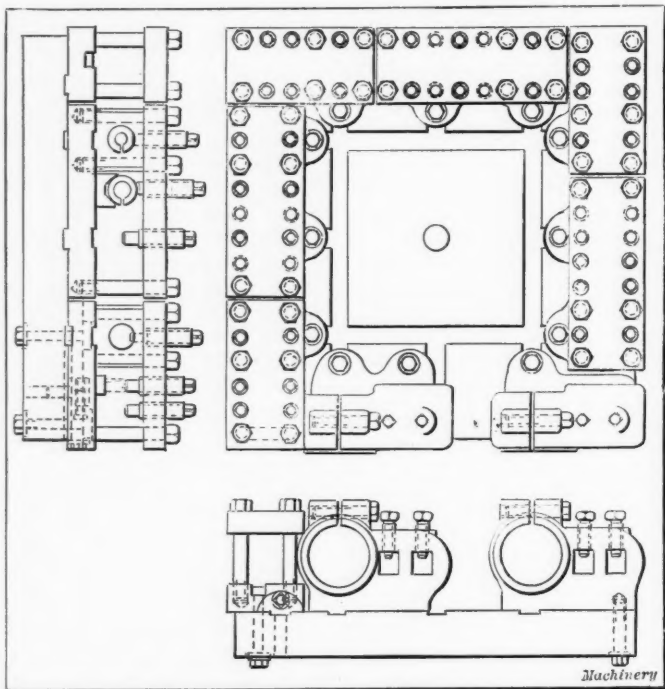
Elevations and Plan View of Turret and Tool Blocks
